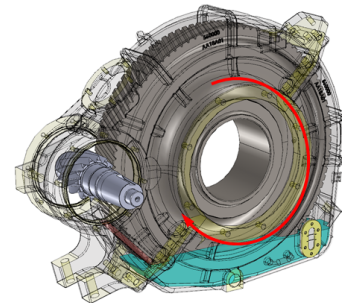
Driving Gear Model (Wheel gear Clockwise).
